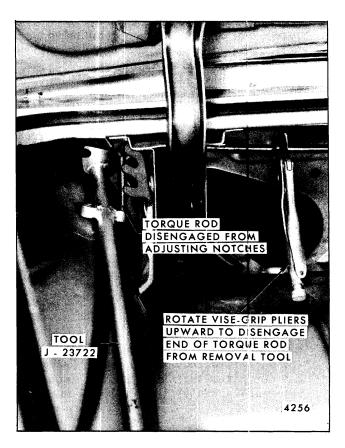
Rear Compartment Torque Rod Removal - Cadillac "C and E" Styles
